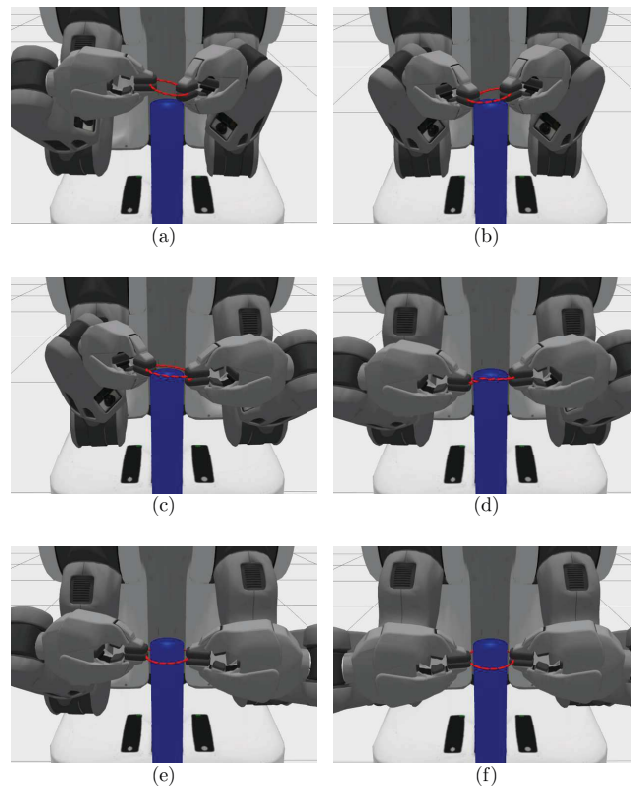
Assembly process in simulation at (a) end of step 1, (b) end of step 2, (c) end of step 3, (d) end of step 4, (e) end of step 5 and (f) end of step 6.
